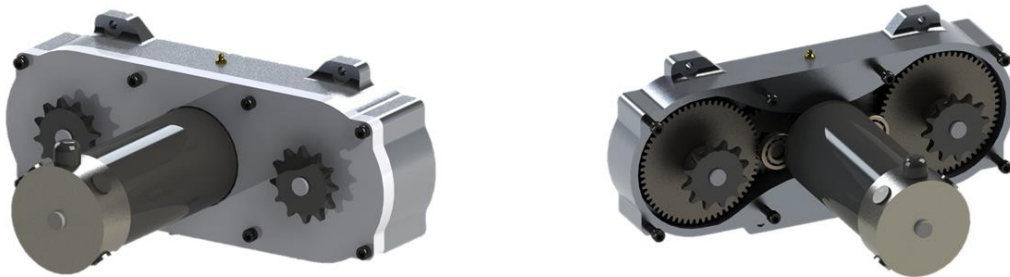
2-Stage Gearbox With and Without Cover Plate.
